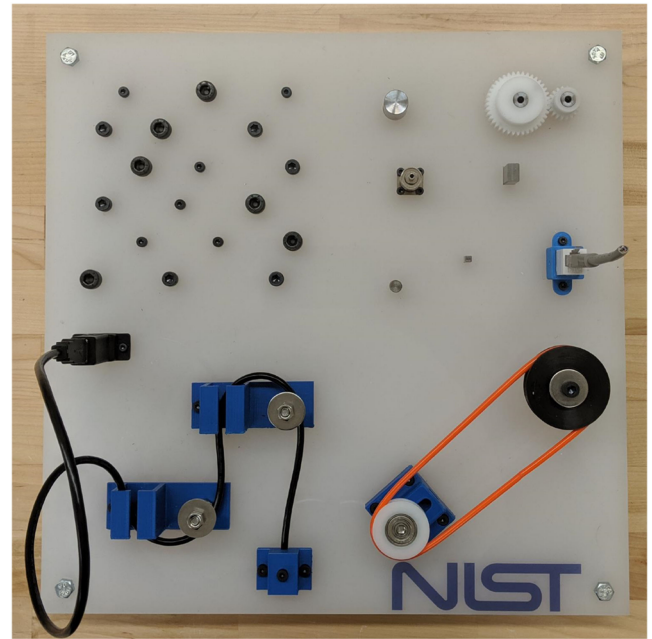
Task board used in the IROS 2019 Robotic Grasping and Manipulation Competition: Manufacturing Track.
